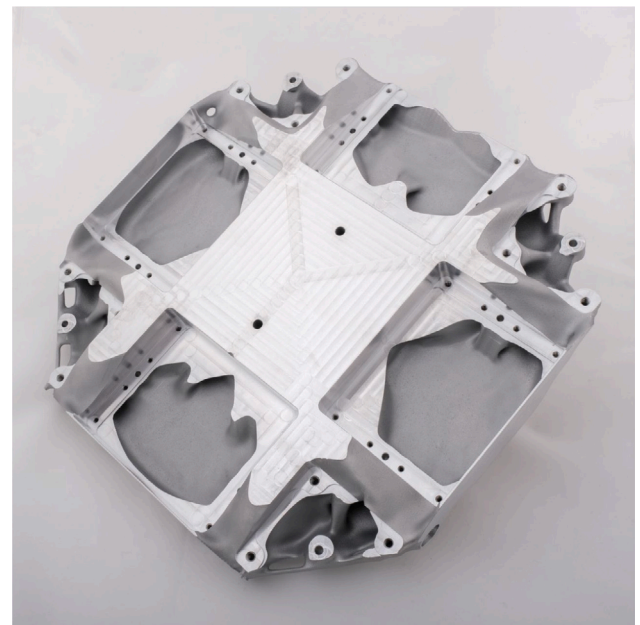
After machining, support structures are removed and interfaces for the components added.
